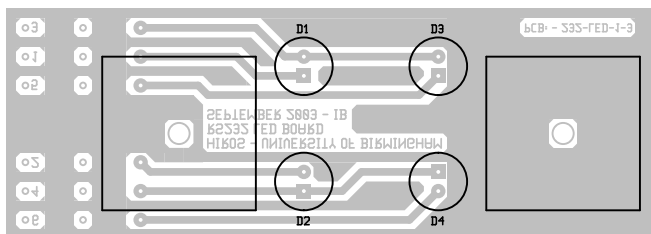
RS-232 LED Board component layout and solder-side tracks.
